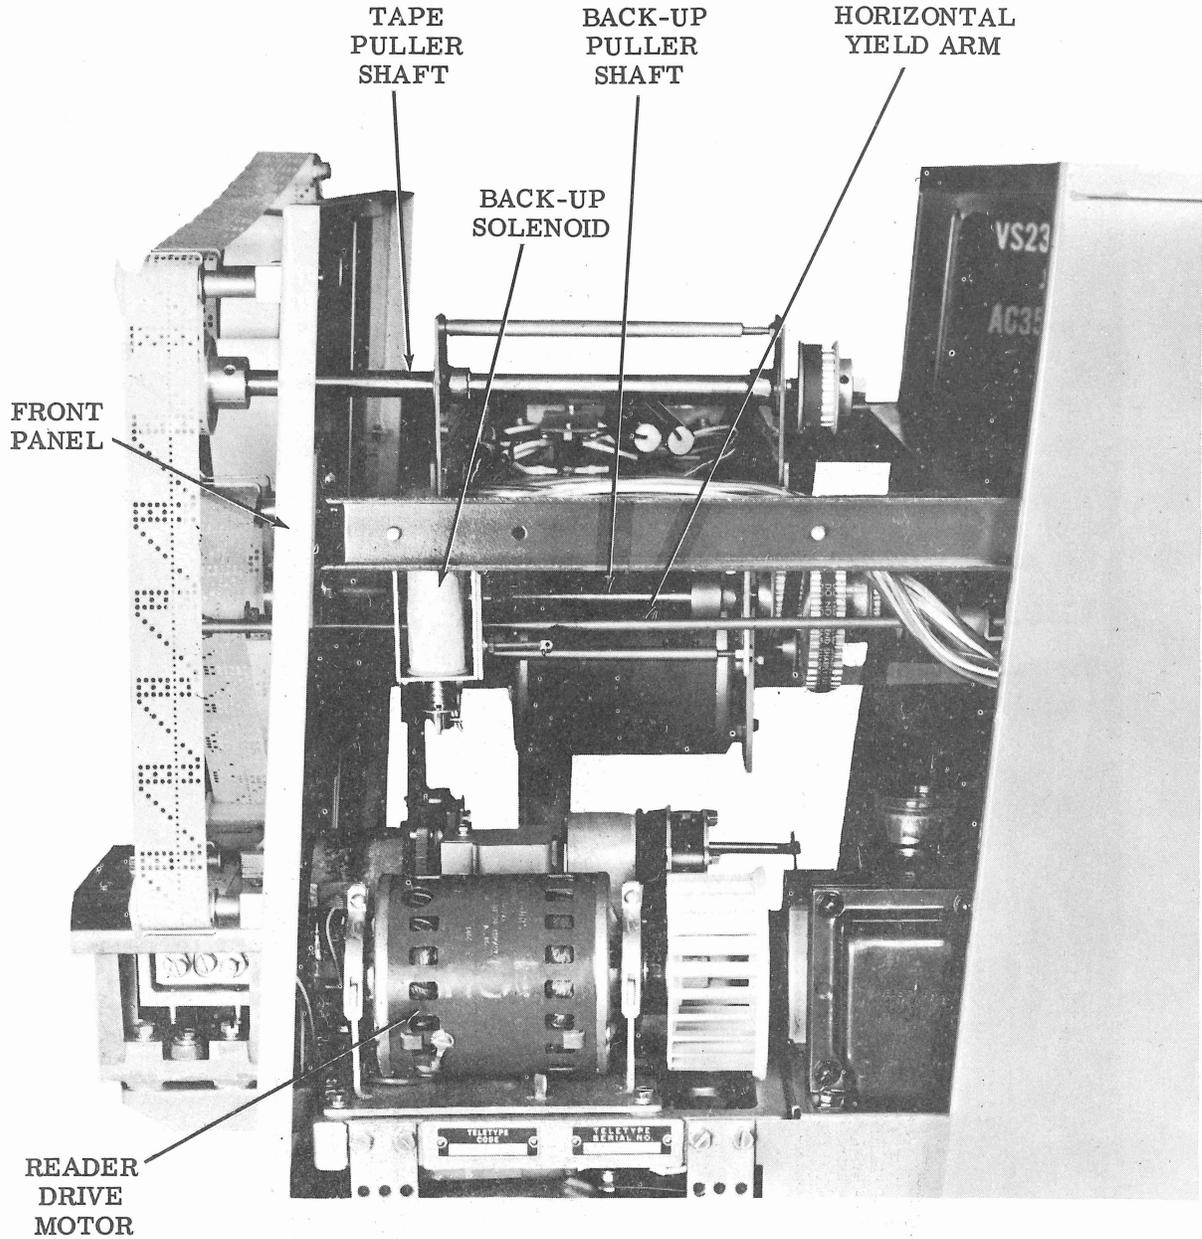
Reader and Tape Transport Assembly, Right Side View
